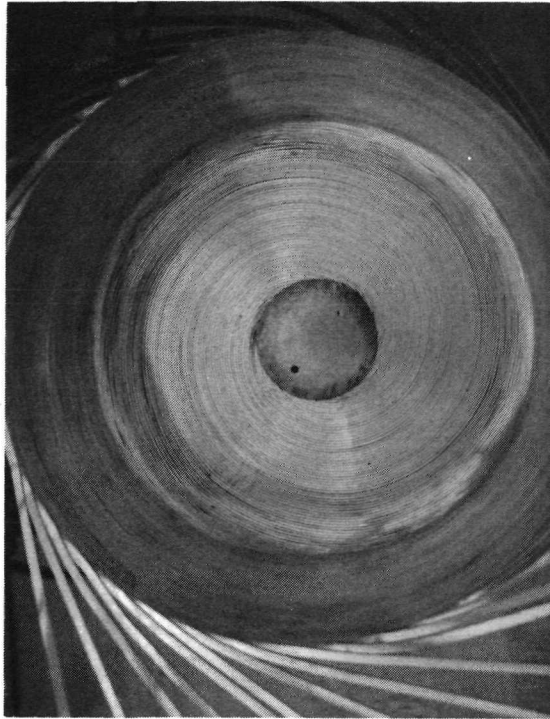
FINISHED TUBE WOUND ASSEMBLY
